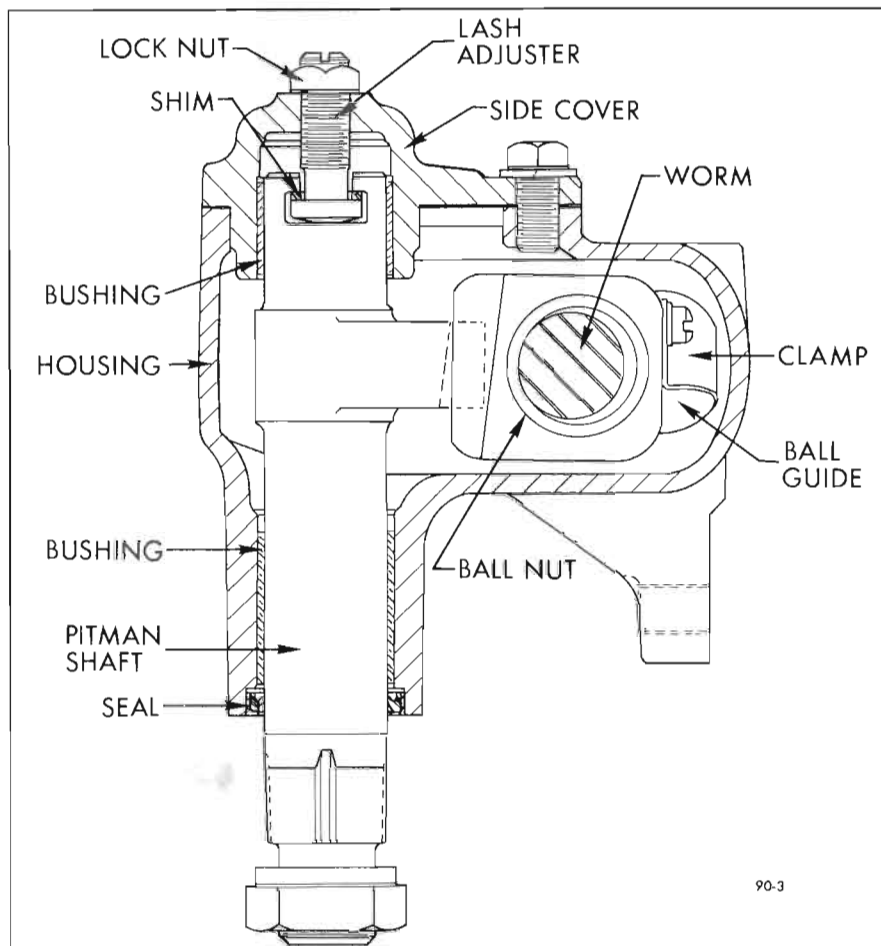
Steering Gear Pitman Shaft and Ball Nut
